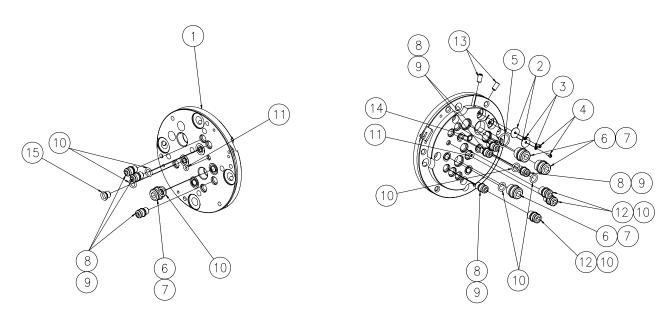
A10747-00 Rear Plate Assembly (Regulator Version)
